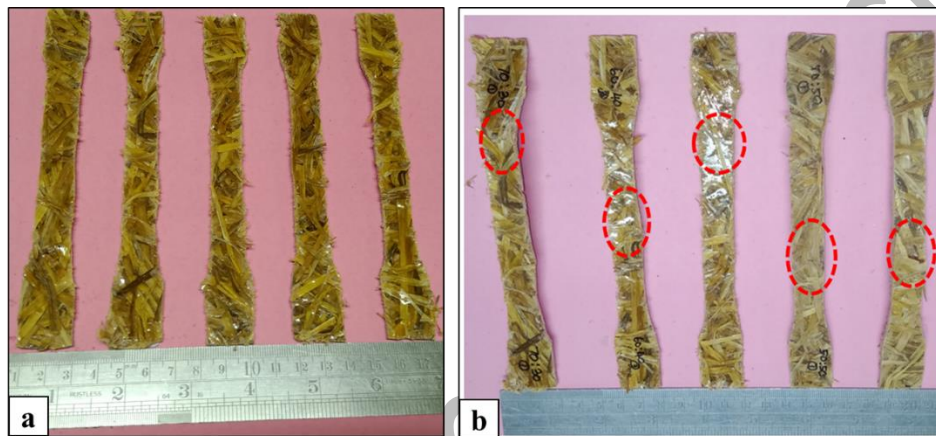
Photographic images of tensile test fractured specimens a) before b) after
